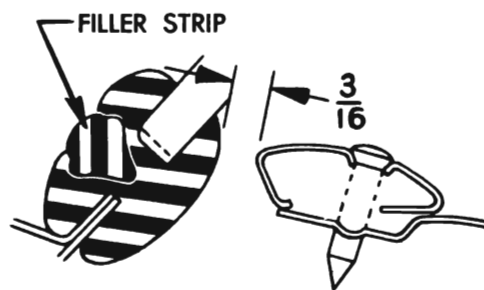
Sectional View of Windshield Glass Channel and Moldings—1949 Series 50-70
